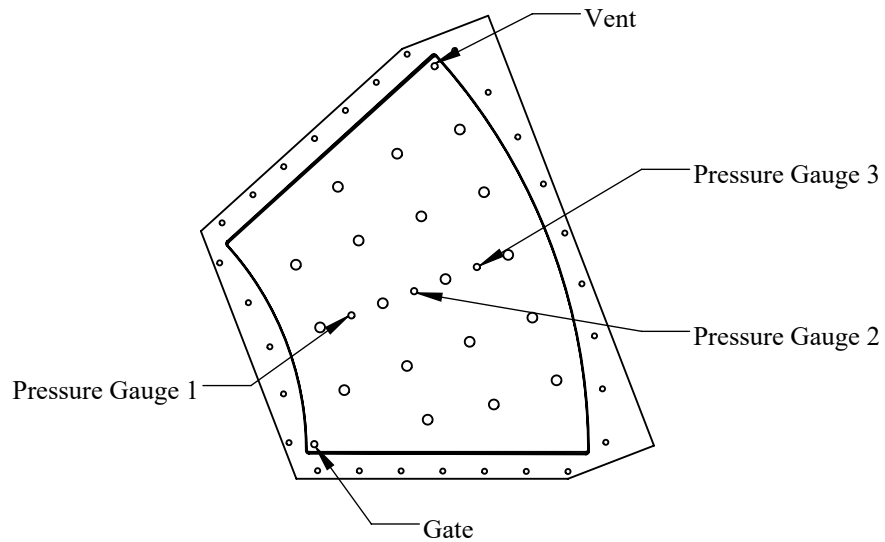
Mold top showing selected gate and vent placement, and pressure gauge locations.
